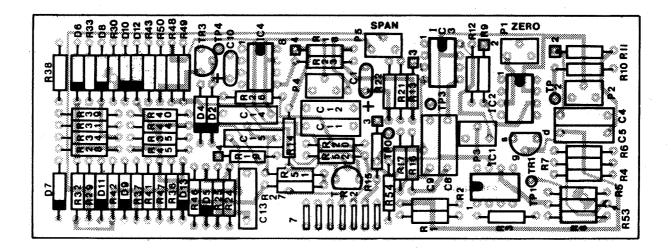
3-WIRE RTD BOARD, PCB COMPONENT LAYOUT (Drawing No.AH129243, Issue 2)
